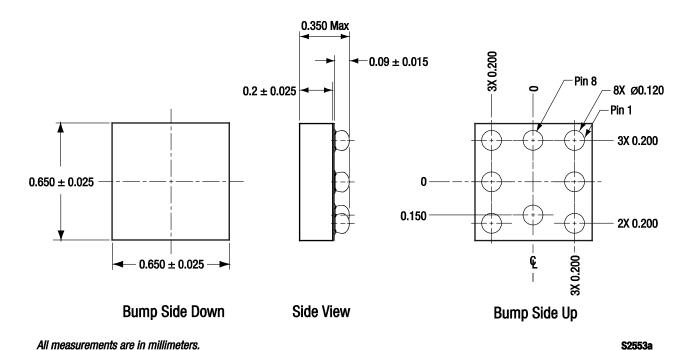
SKY13386-000 8-Bump CSP Package Dimensions
